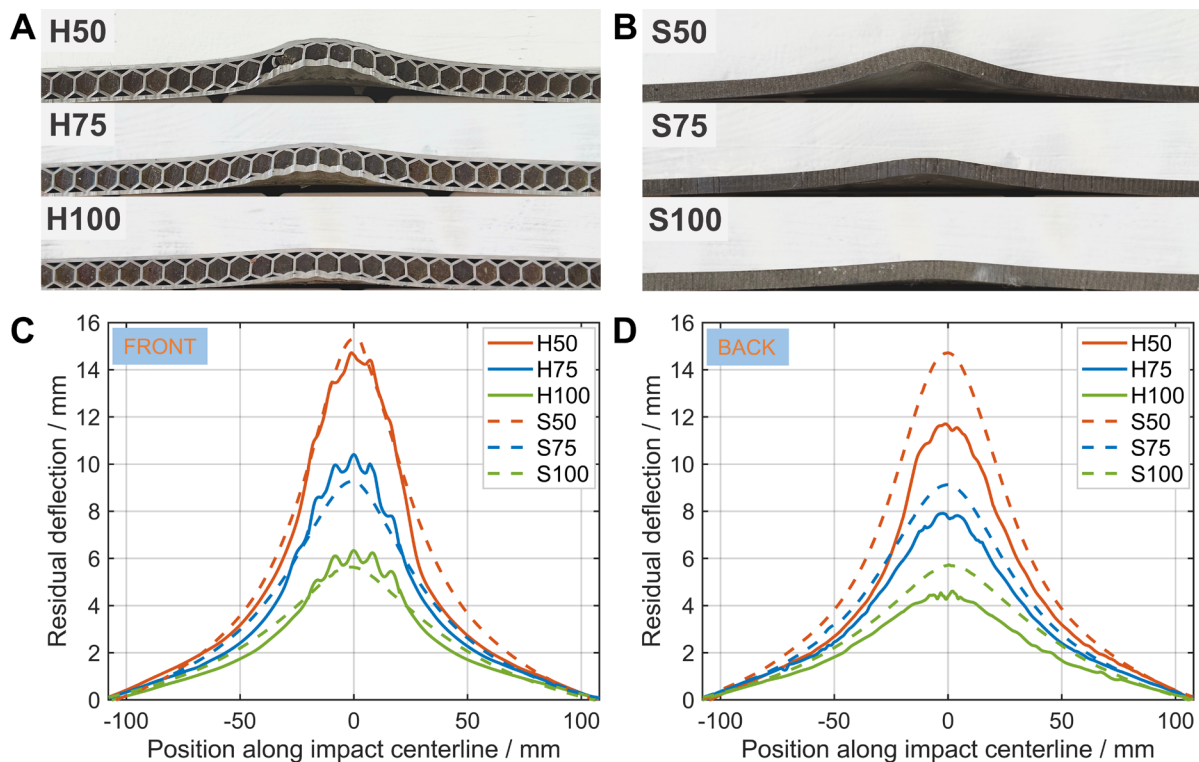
Deflection of the specimens: (A) Cross-sectional photographs of honeycomb sandwich structure specimens, (B) cross-sectional photographs of solid specimens, (C) front surface residual deflection of six specimens, and (D) back surface residual deflection of six specimens
